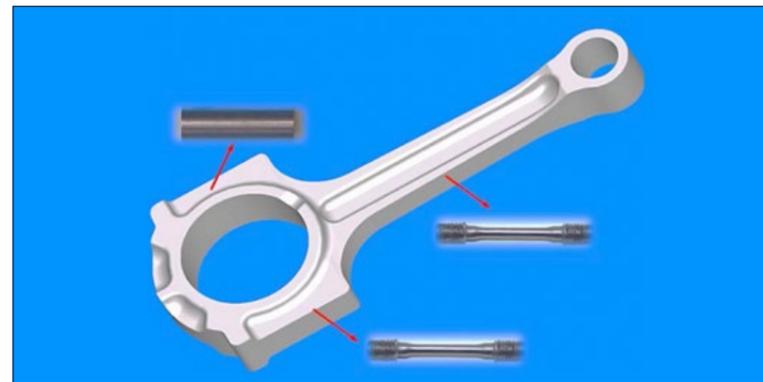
Tensile and compressive yield strength specimens machined from connecting rods [8]
